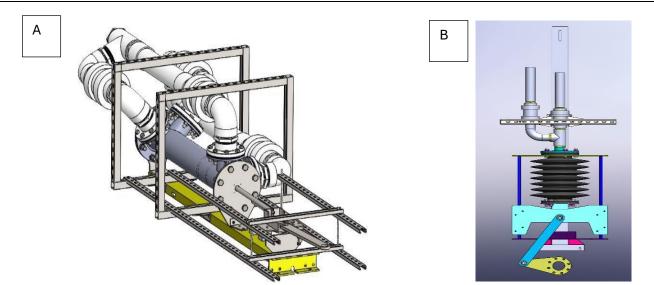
Assembly Optimization a) Old Assembly [46] b) New assembly
